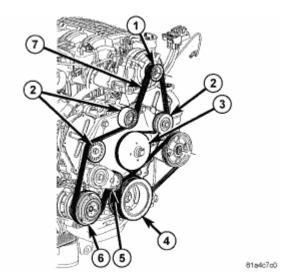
Accessory Drive Belt Routing Courtesy of CHRYSLER LLC
